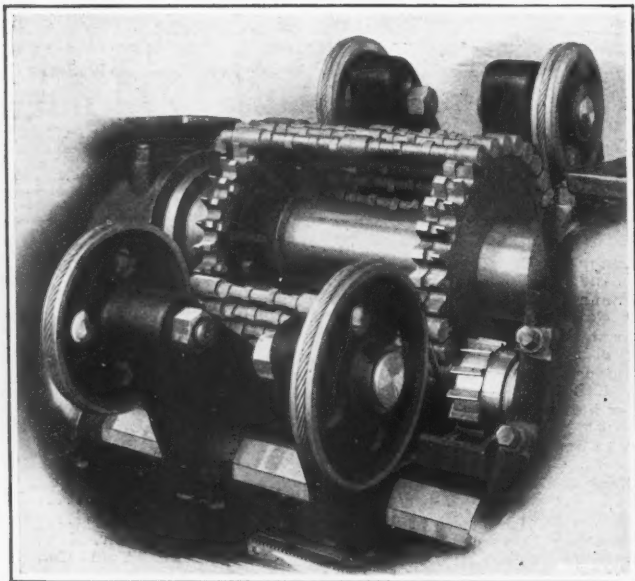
Wire-cable Arrangement for keeping Parts on Work-holding Fixture
